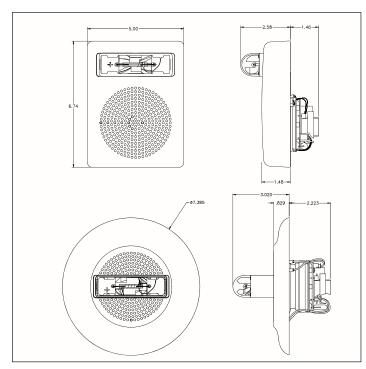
E60H (top) and E60H (bottom) Speaker Strobes - Front & Side Views
